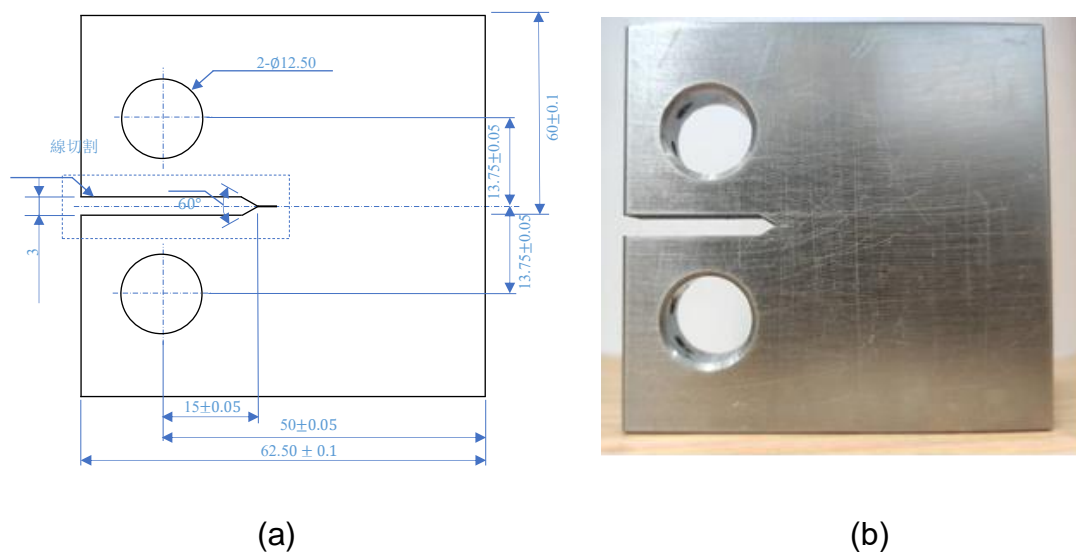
Compact tensile specimen (units in mm): (a) detail size of CT specimen; (b) photo of the CT specimen for the fatigue test
